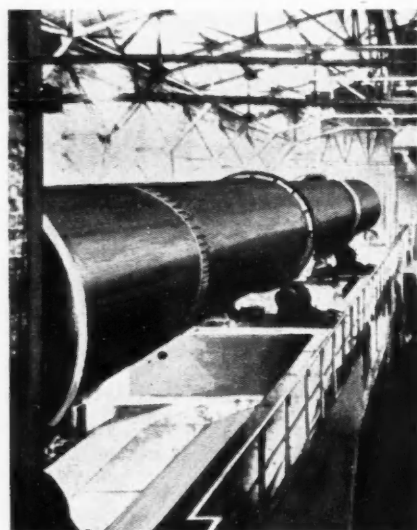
Main body of the cylindrical hearth, which rotates continuously
